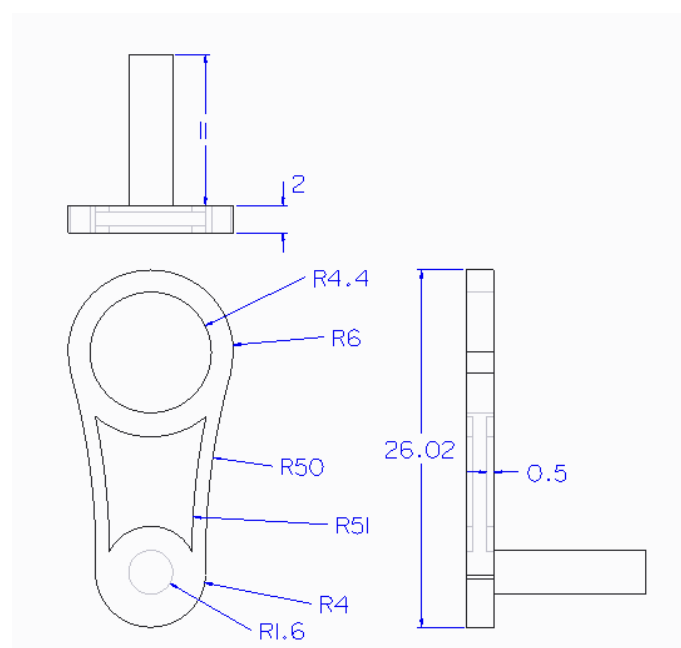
CAD Drawing of Crank Link of Primary Mechanism
